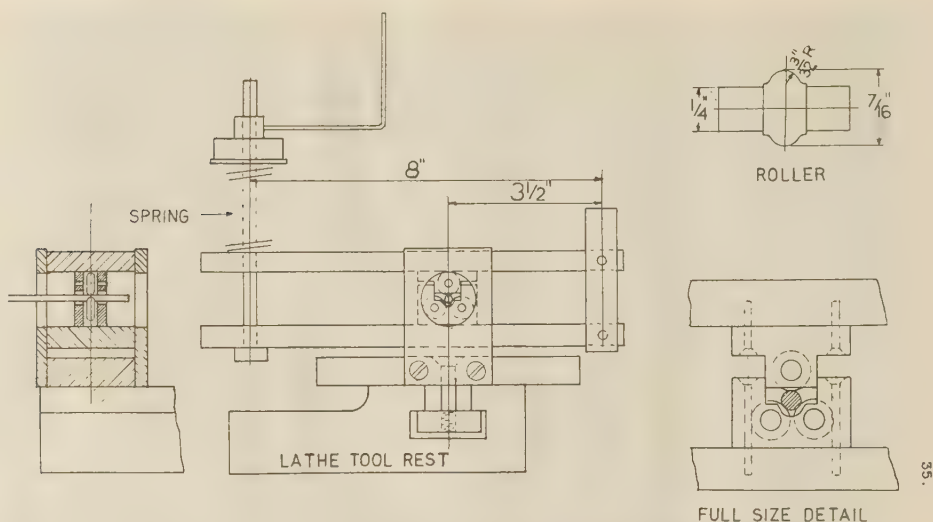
DETAILS OF THE SURFACE-ROLLING DEVICE SHOWN IN FIG. 16
